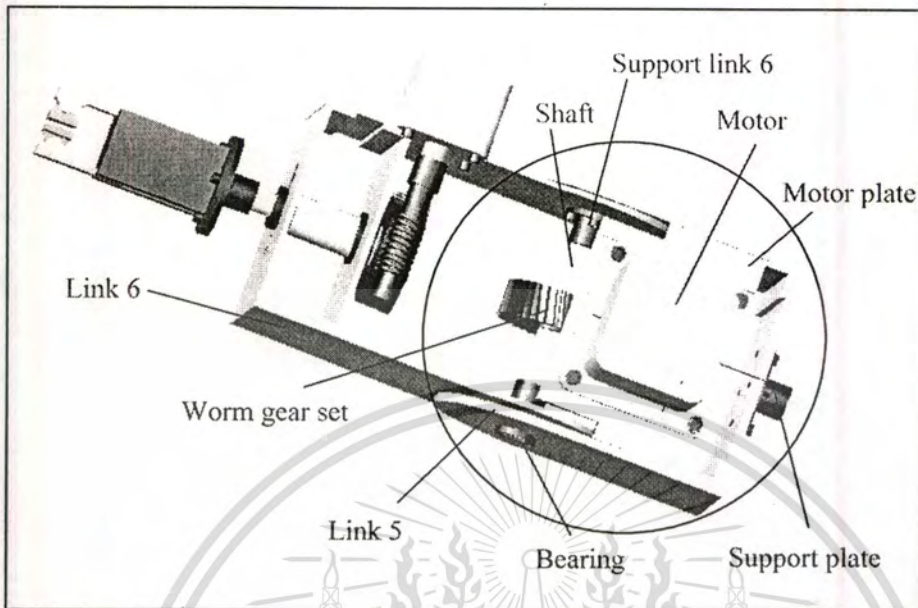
Assembly parts of pitch-joint on the hand (joint 5)
